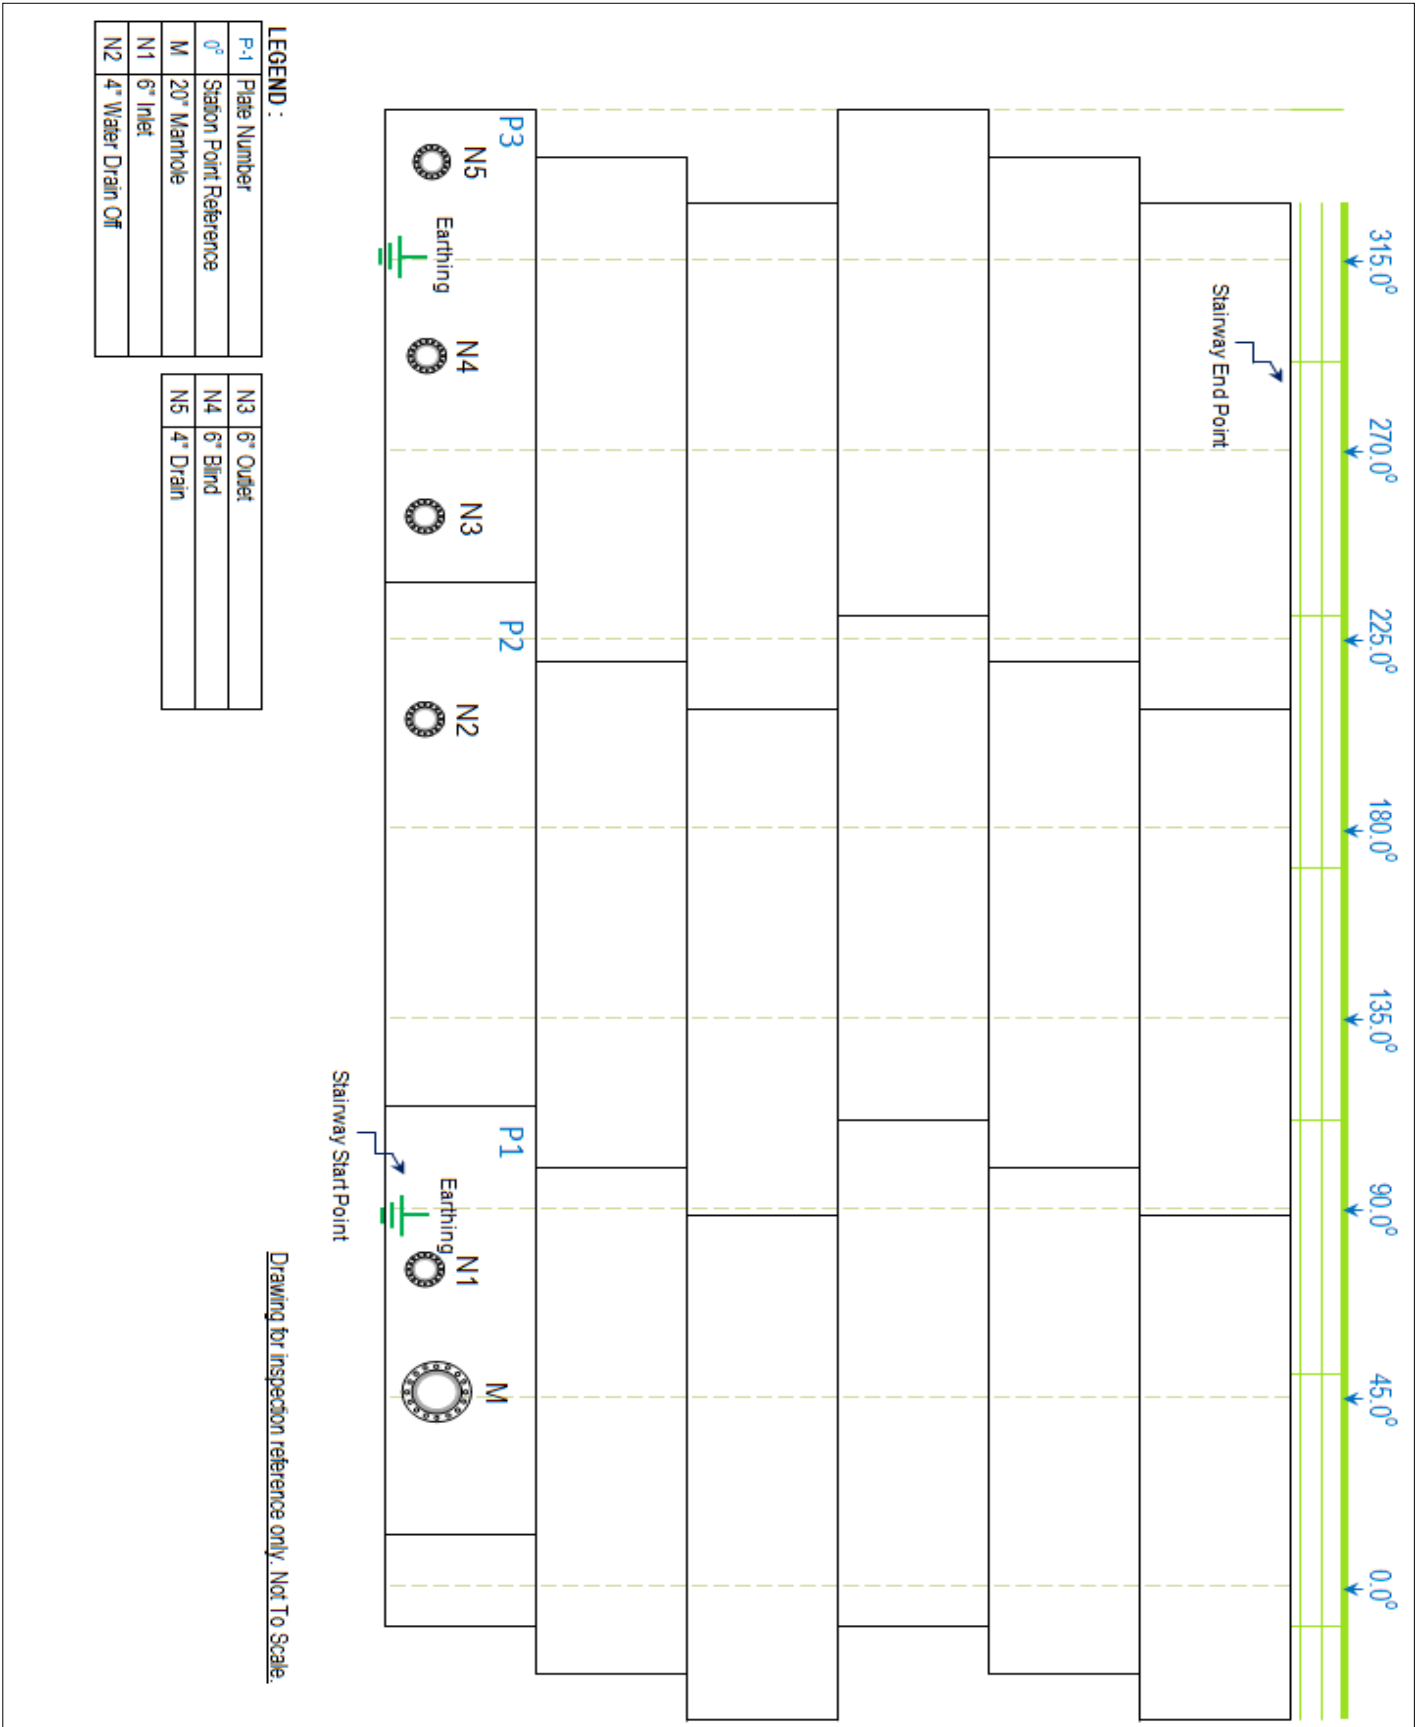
Tank Shell Plate and Nozzle Layout
